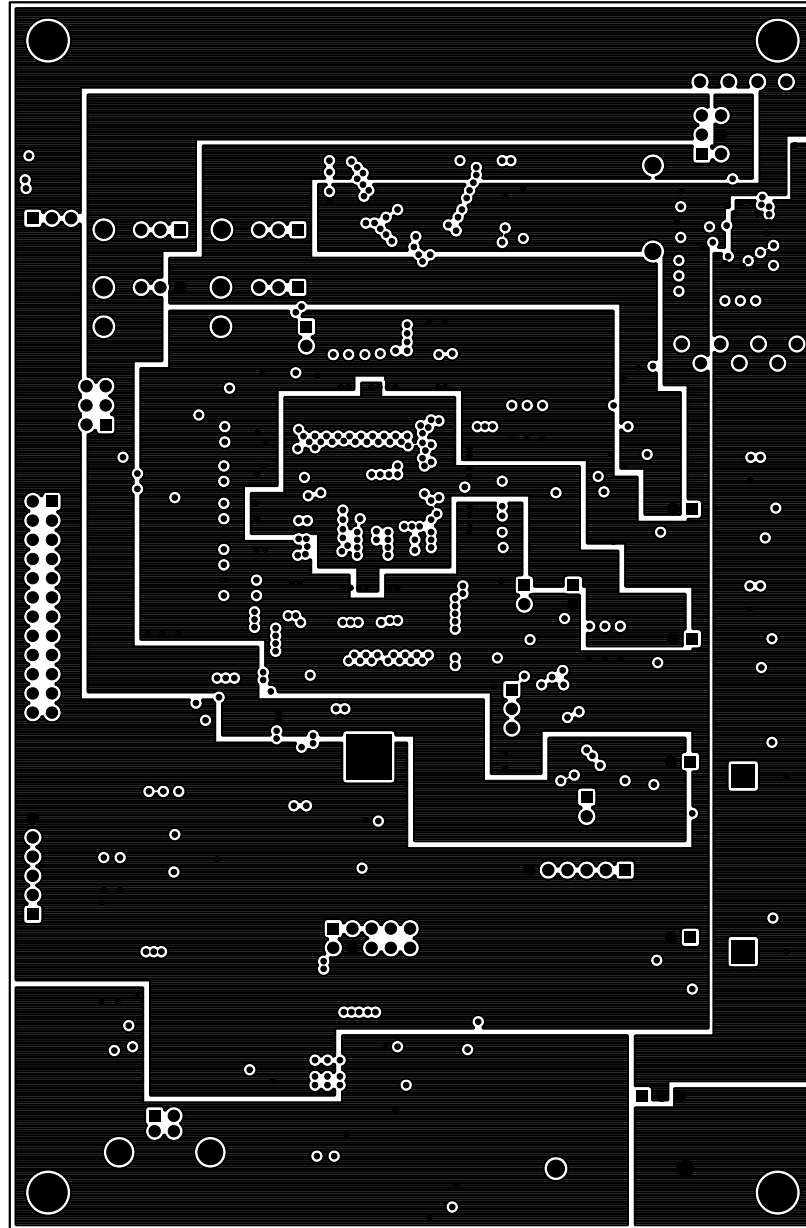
MAX44006 EV Kit PCB Layout—Layer 3
